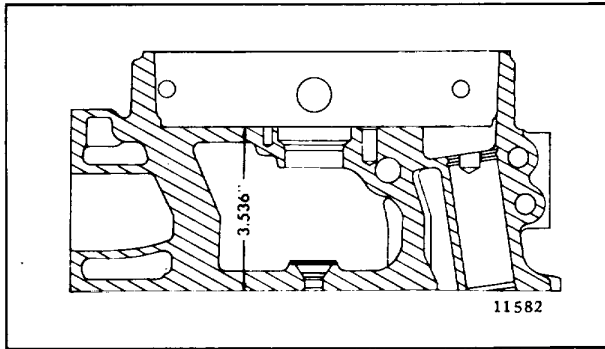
Minimum Distance Between Top and Bottom Faces of Cylinder Head
